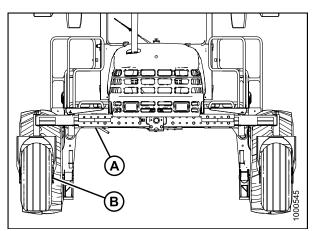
Caster Wheel Assembly and Walking Beam (Engine-Forward View)
